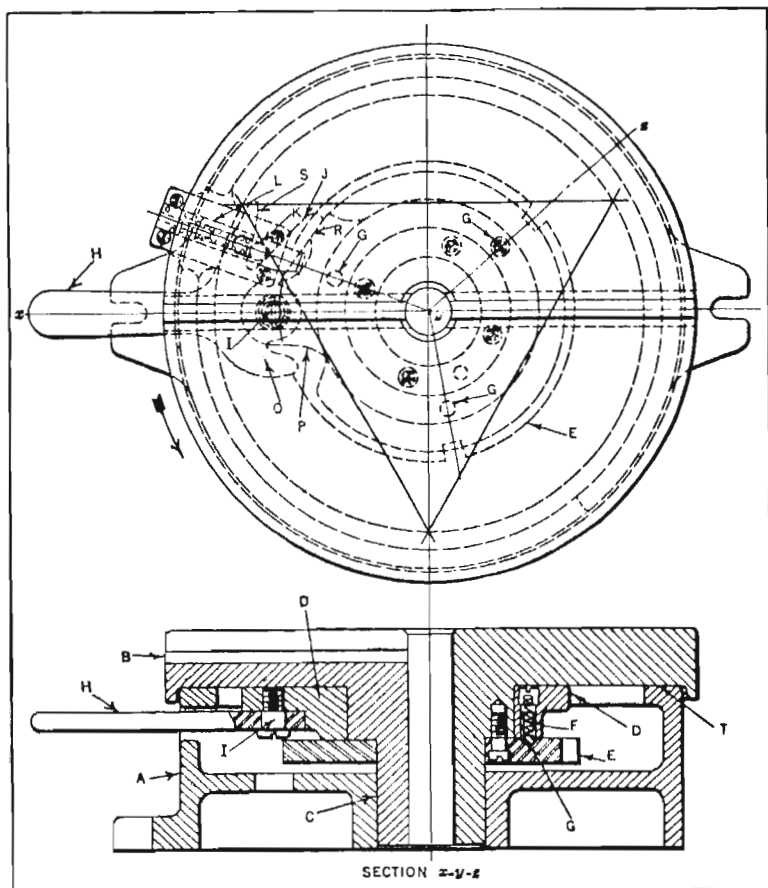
Sectional and Plan Views of Semi-automatic Indexing Fixture
